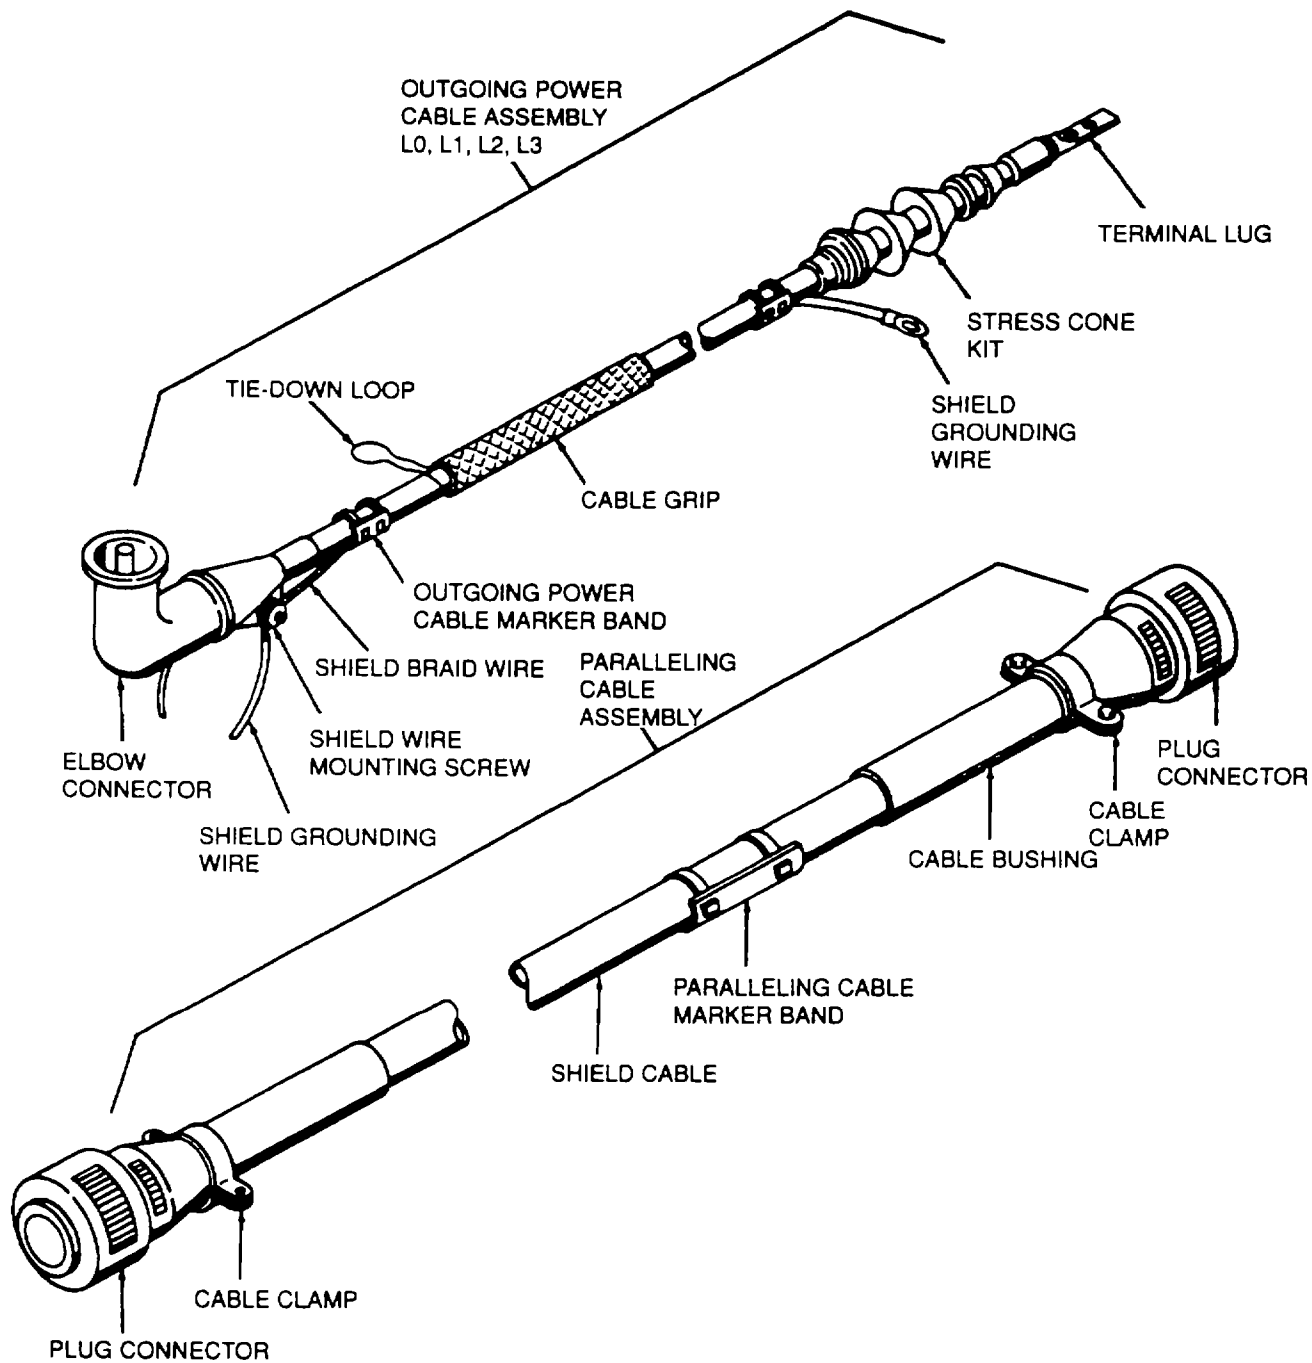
Cable Assemblies (Sheet 2 of 2)
